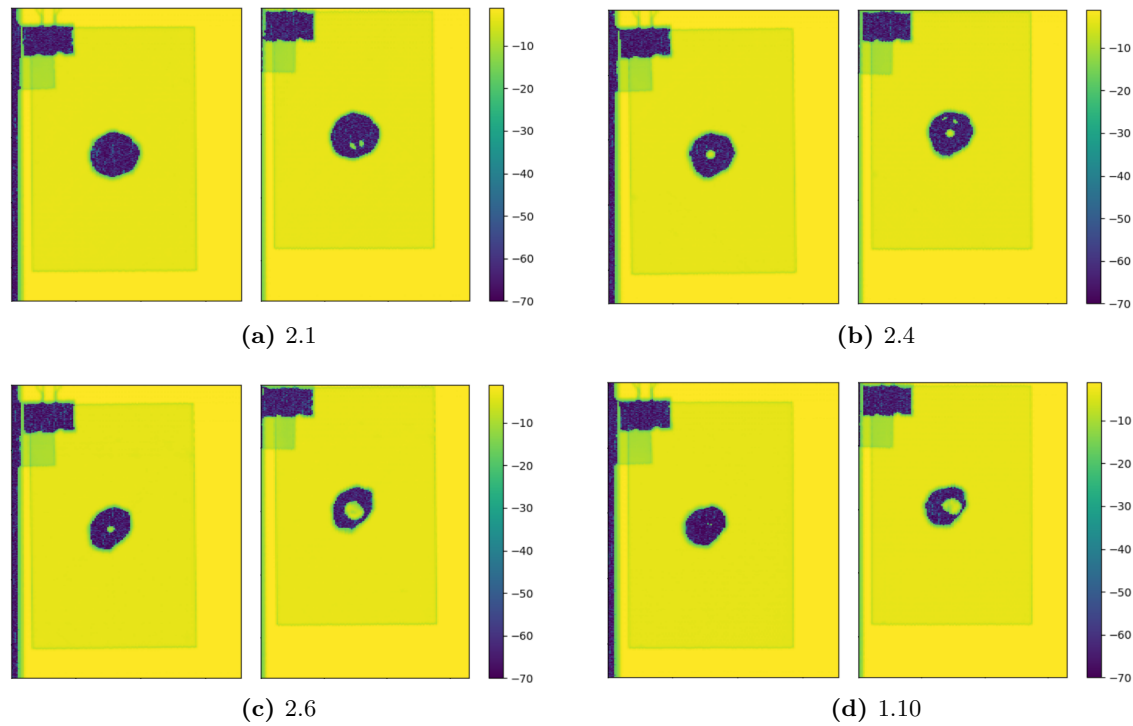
C-scans of all repaired specimens with clamping B. Left: before welding. Right: after welding.
